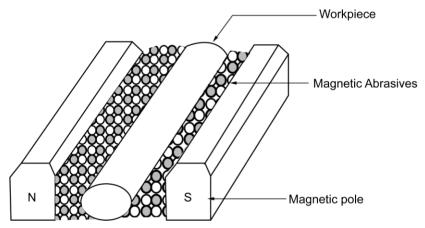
Magnetic abrasive finishing-cylindrical surface
